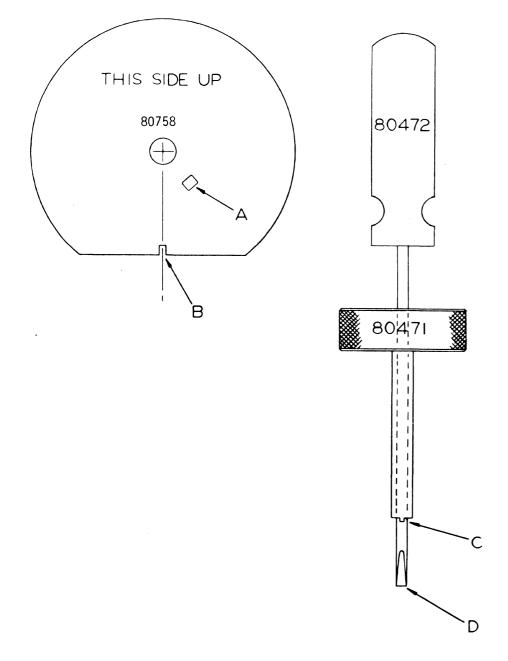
PRINTWHEEL ALIGNMENT TOOLS
